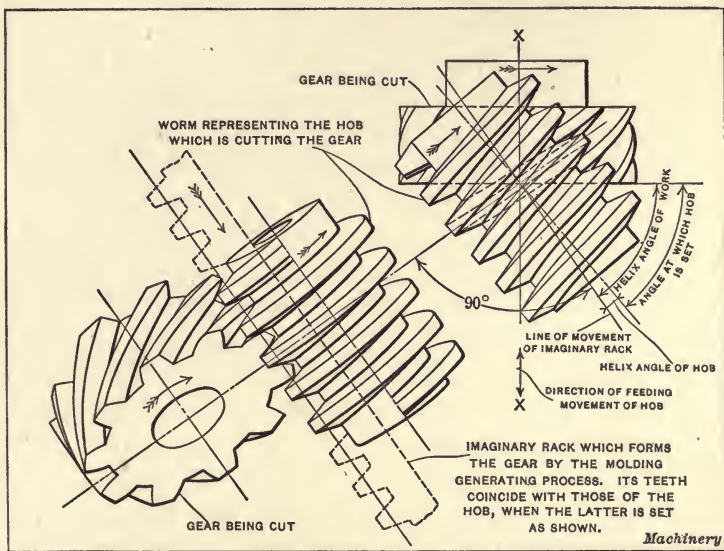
Molding-generating Method for Cutting Spiral Gears as Exemplified in the Hobbing Process
